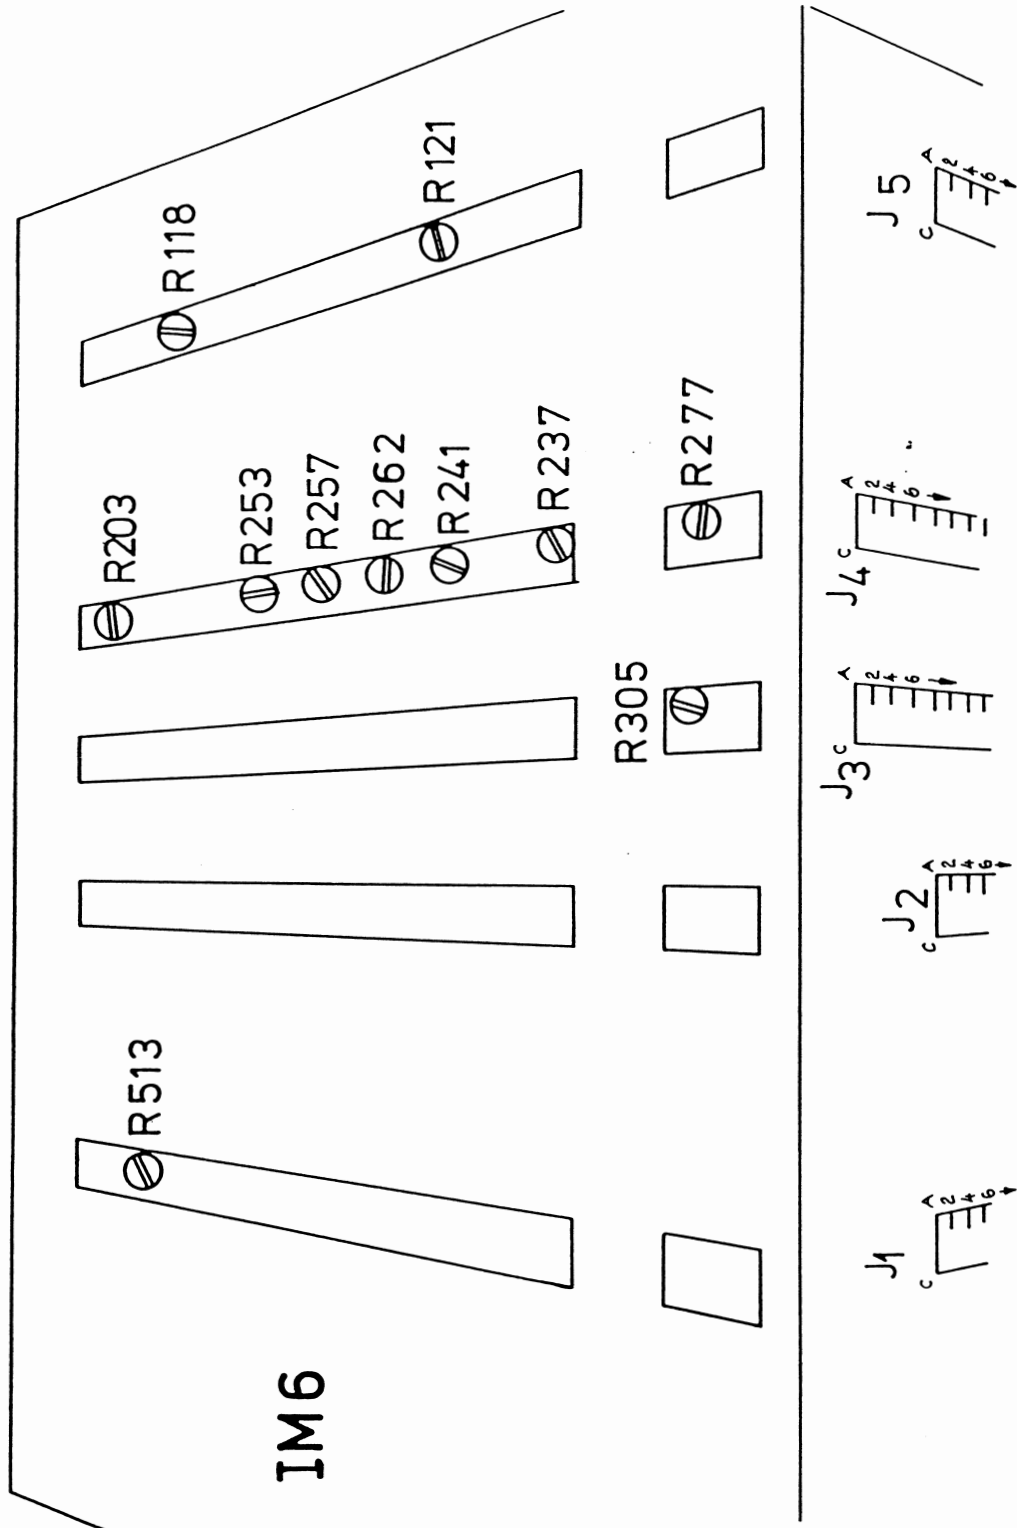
Location of Printed Circuit Boards and Trimmers.
